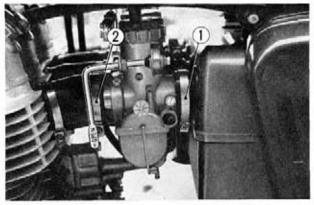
(1) Air cleaner connecting band (2) Carburetor insulator band
